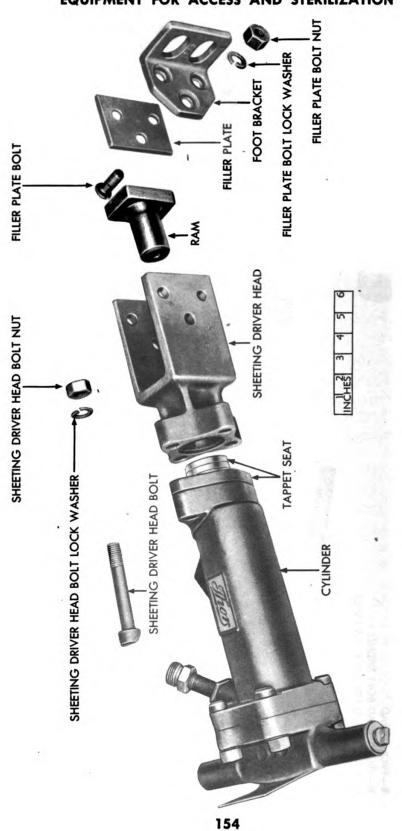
Pneumatic Paving Breaker With Sheeting Driver Head Exploded
